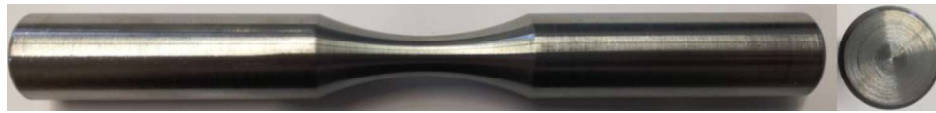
Specimen used in uniaxial and biaxial fatigue tests
